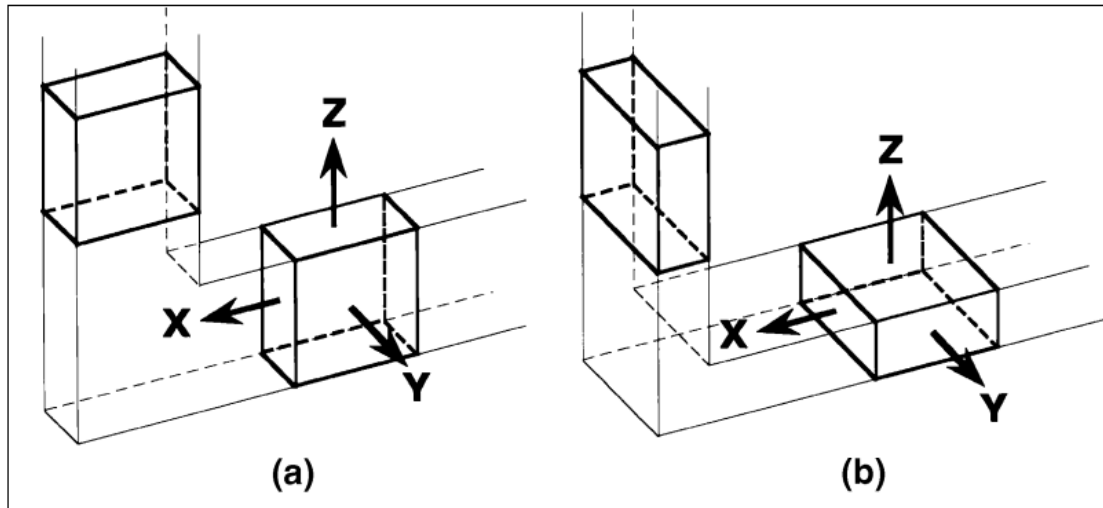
Implementation of ECAP on plate samples: (a) vertical arrangement and (b) horizontal arrangement [32].
